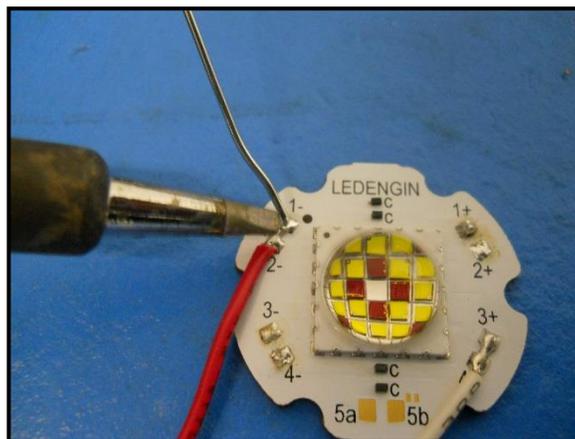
Soldering a pre-tinned wire to a pre-tinned solder pad
